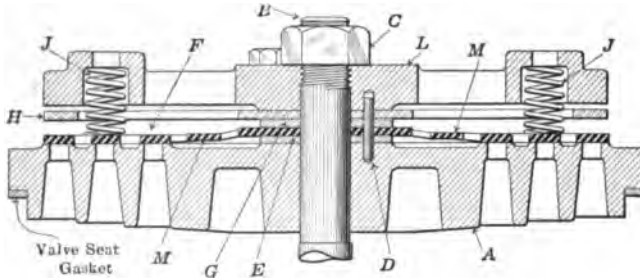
Cross-section of Ingersoll Rogler Valve with seat, cap and springs.
